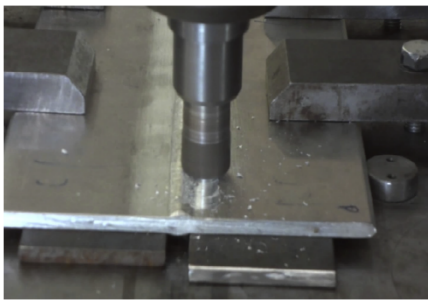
MIG welded plate post-processed by FSP.
